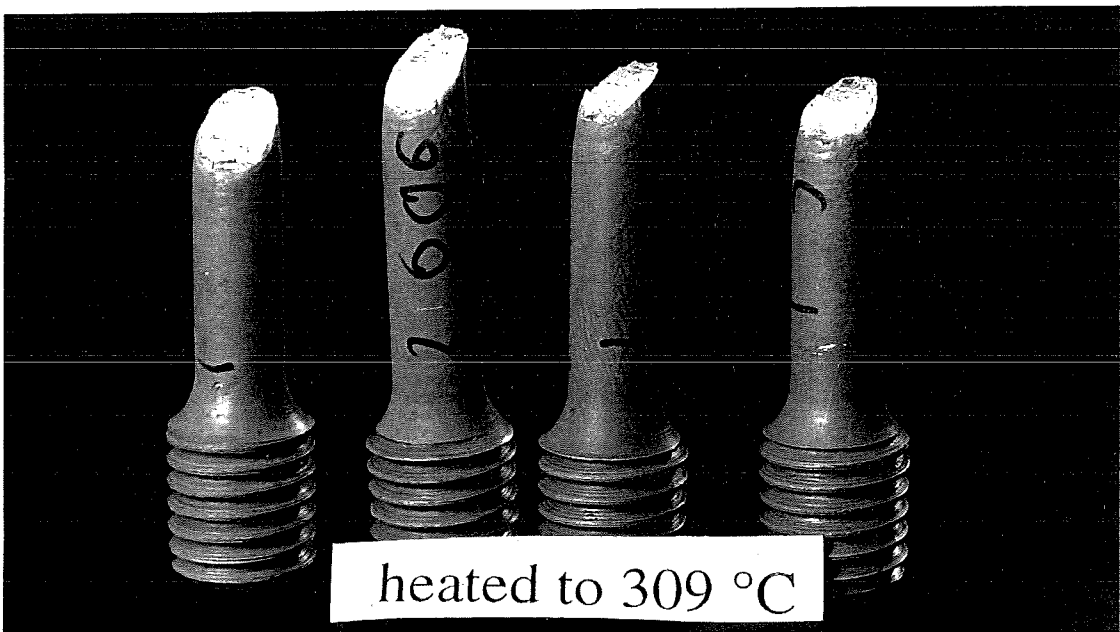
Fractured AA6061 tensile specimens in C condition
